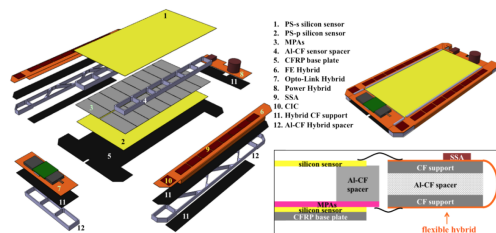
Exploded view of the Pixel Strip (PS) Module [7]
